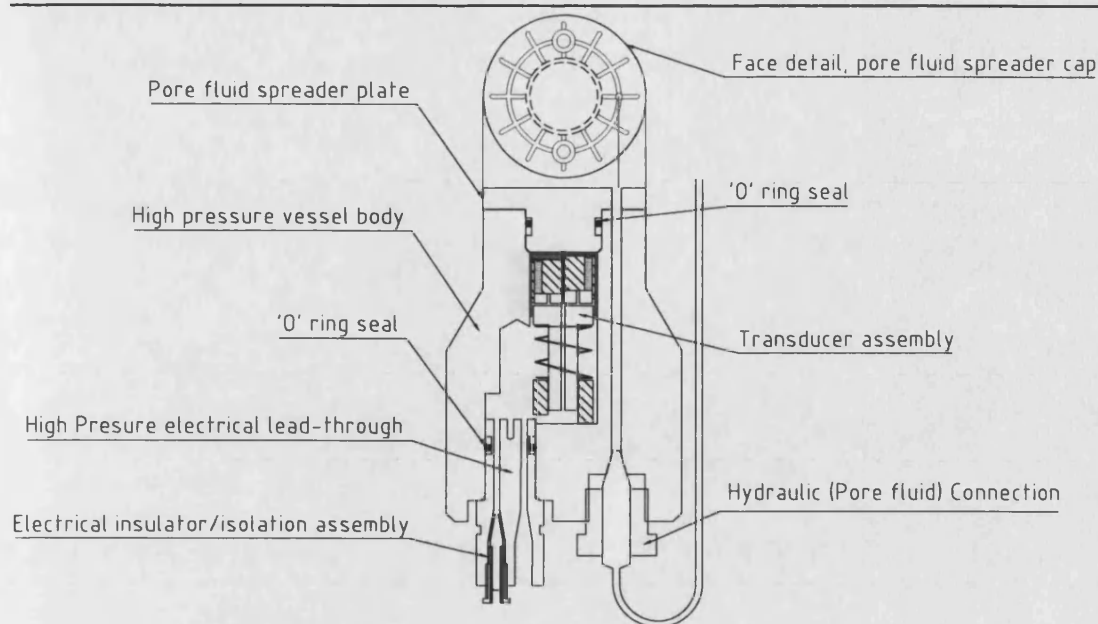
Detail of an 'Endcap', as seen in figure 3-19. Engineering drawing courtesy Steve Boon
